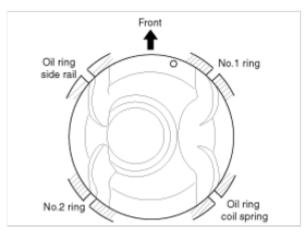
Identifying Piston Rings Installation Position Courtesy of HYUNDAI MOTOR AMERICA
